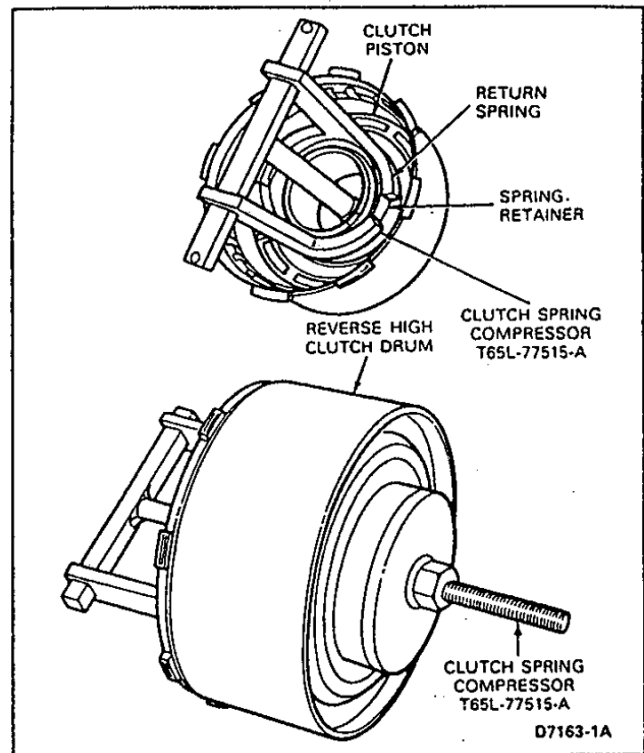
Removing or Installing Reverse-High Clutch Piston Snap Ring
